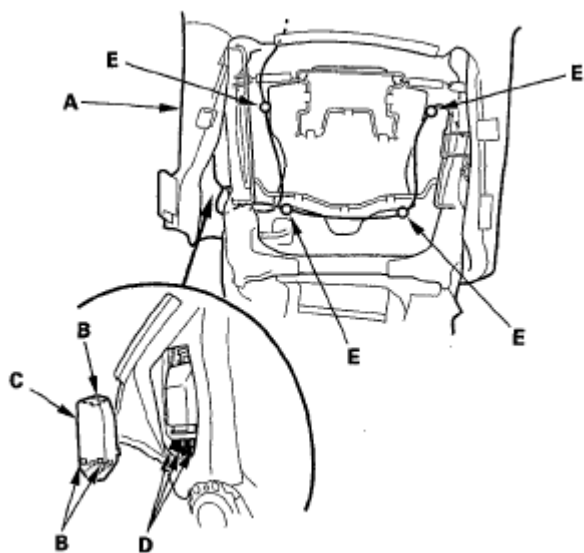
Identifying Seat-Back Cover, Hooks And ODS Unit Cover
